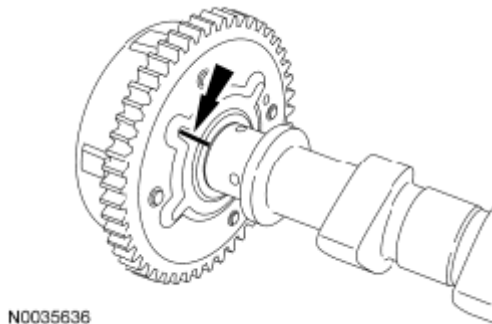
Locating Sprocket & Camshaft Reference Mark
